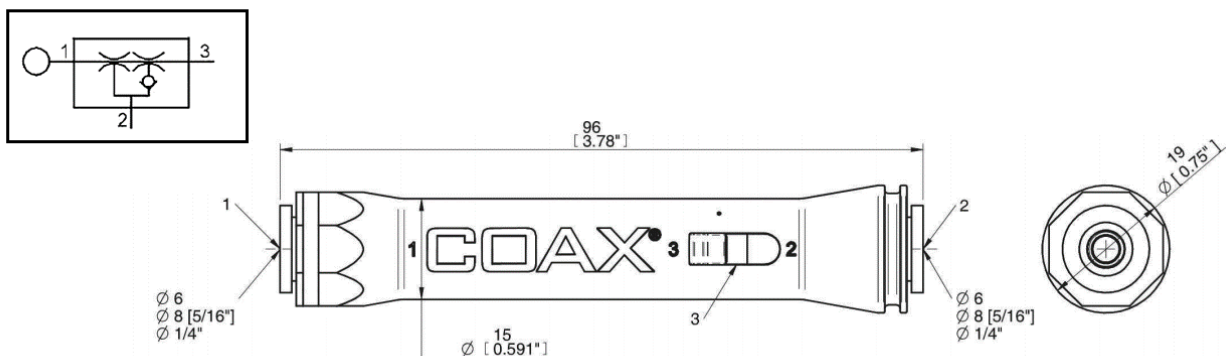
External dimensions for the piINLINE© Mini Si 6-6 vacuum generator
